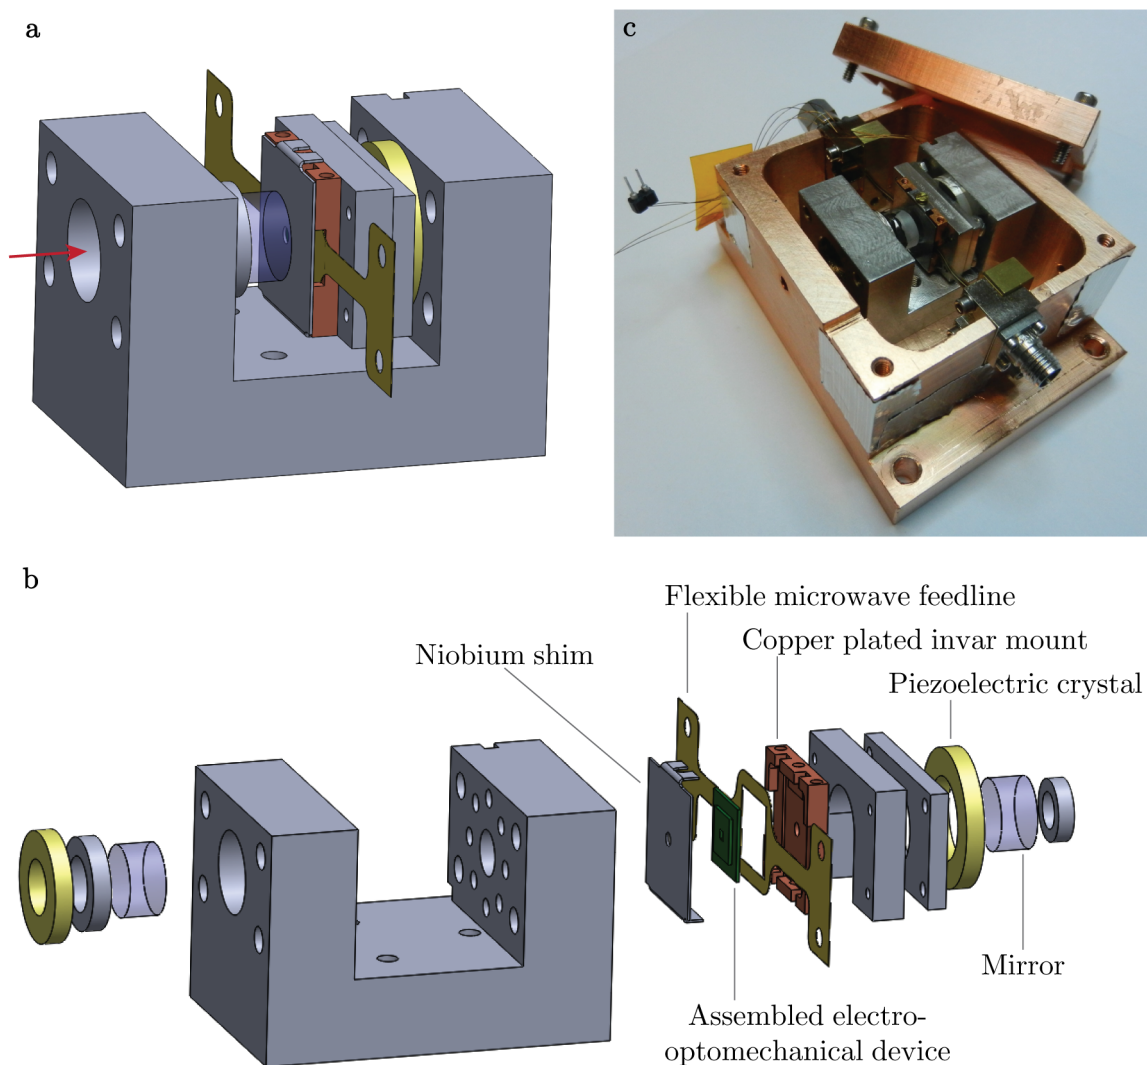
(a) CAD drawing of the optical cavity assembly with the electro-optomechanical chip in place. (b) Exploded view. (c) Photo of the assembly. Image courtesy R. W. Peterson.
